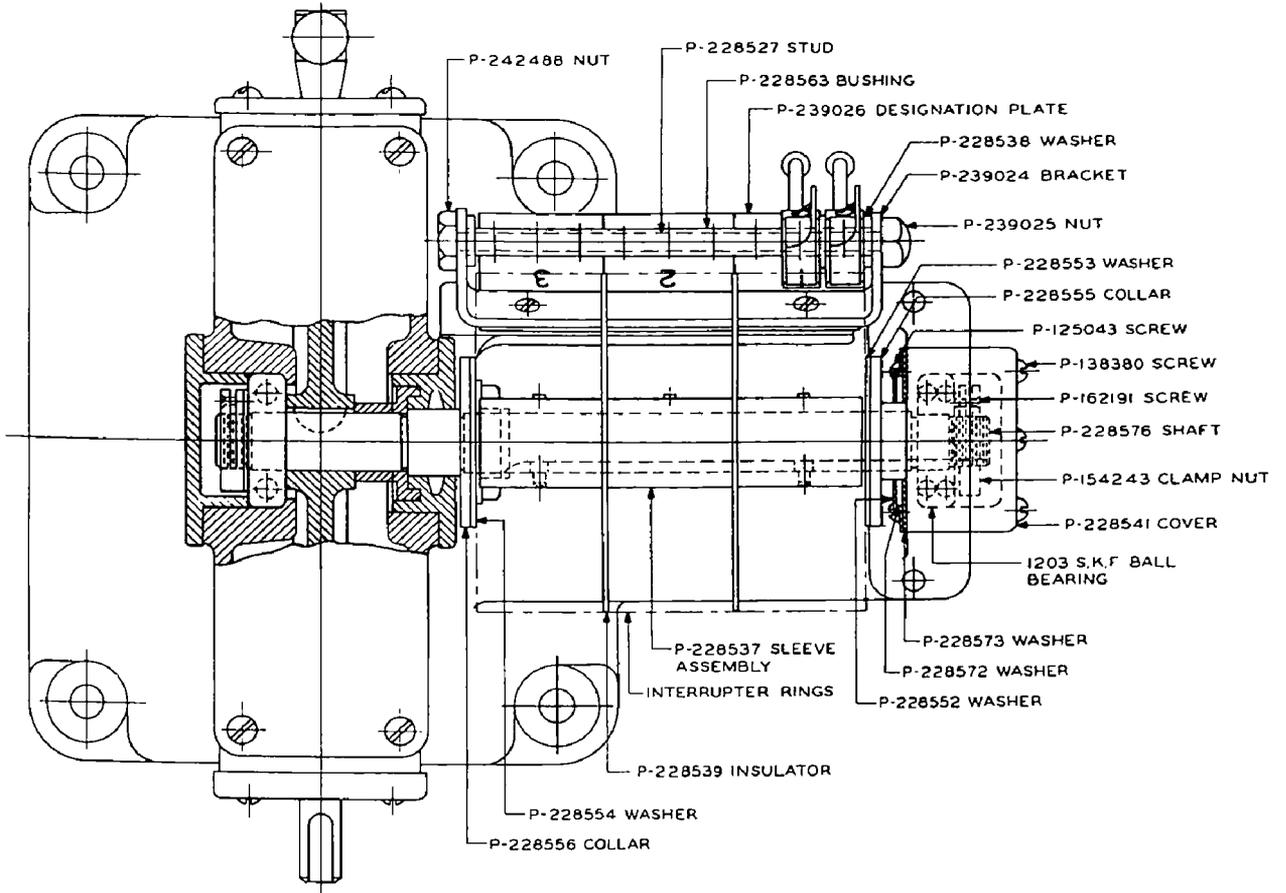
1A Interrupter Mounting—Top View (For Side View See Fig. 5)
